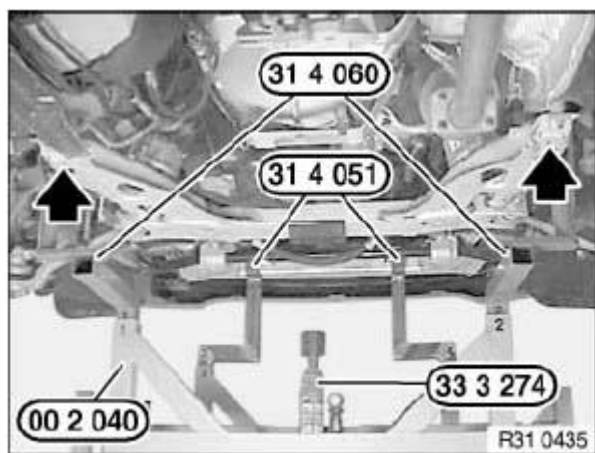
Identifying Special Tools 31 4 051, 31 4 060, 33 3 274 And 00 2 040
